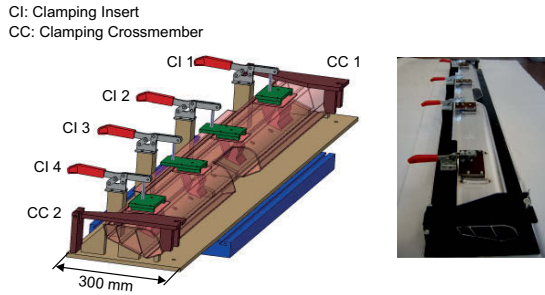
Reproduction of the real clamping fixture for the crossbeam welded assembly
